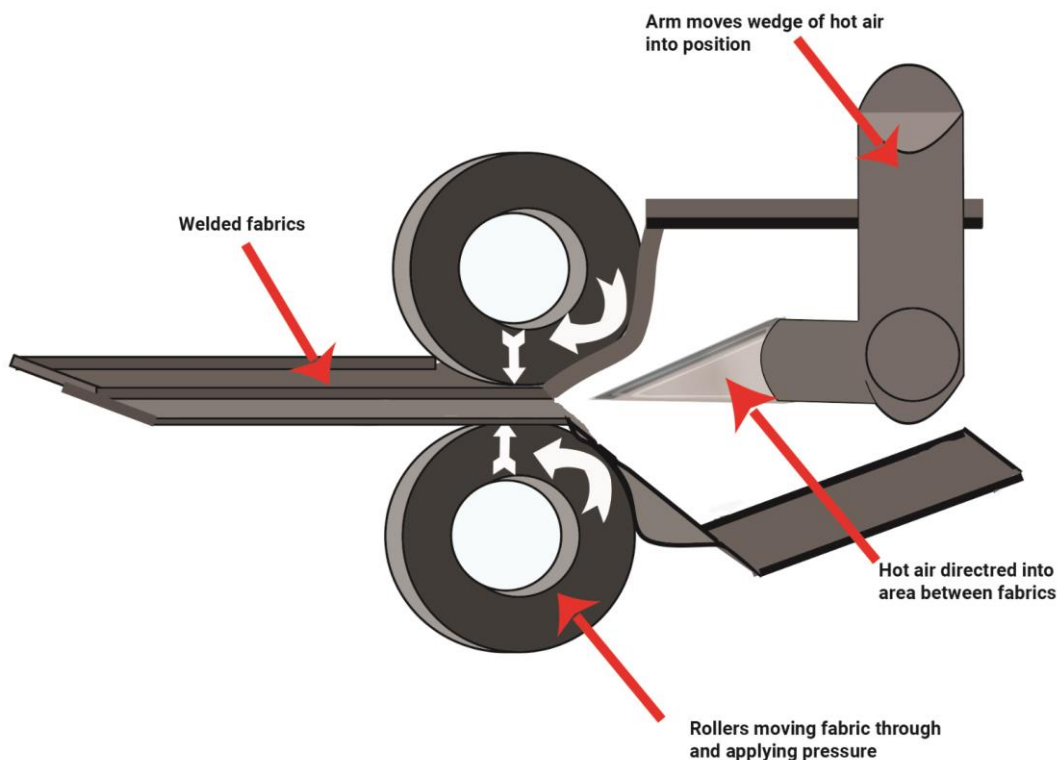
Hot Air wedge welding diagram. Source: <https://lightweightmanufacturing.com/uncategorized/types-of-industrial-fabric-welds/>
